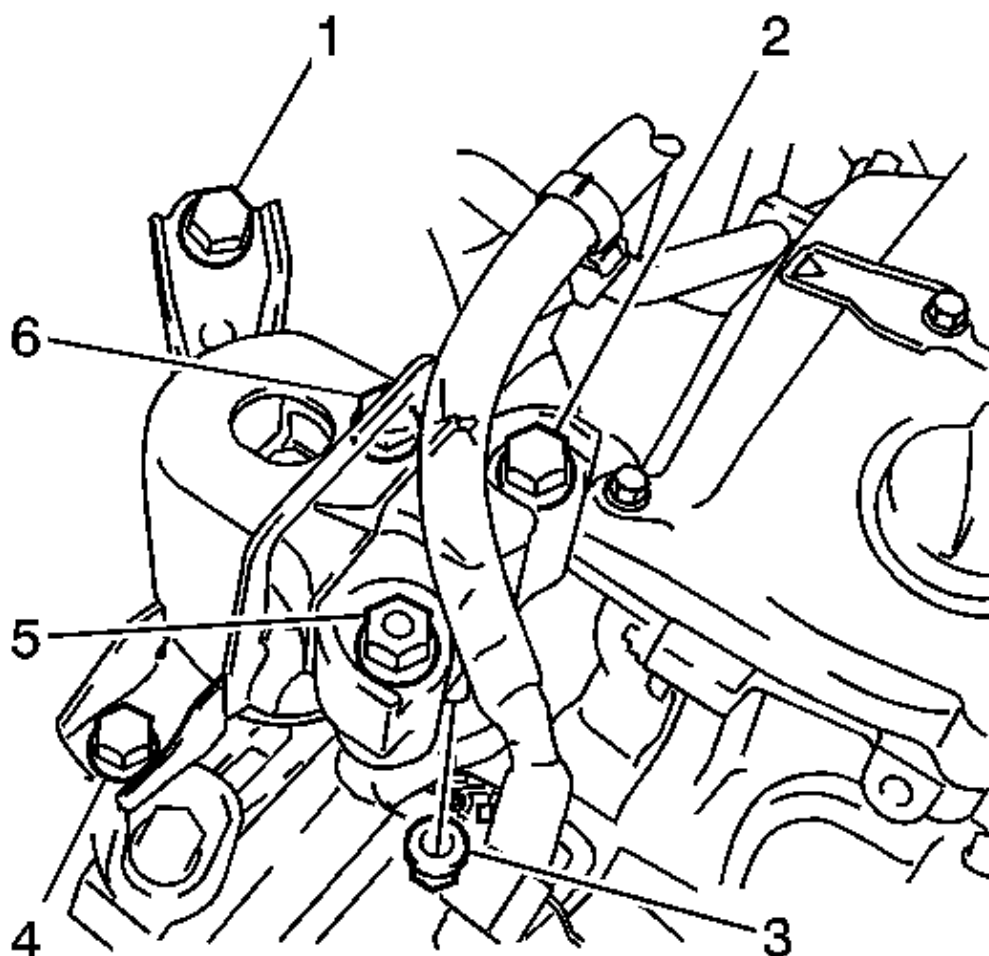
View Of Right Engine Mounting Insulator Sub-Assembly
